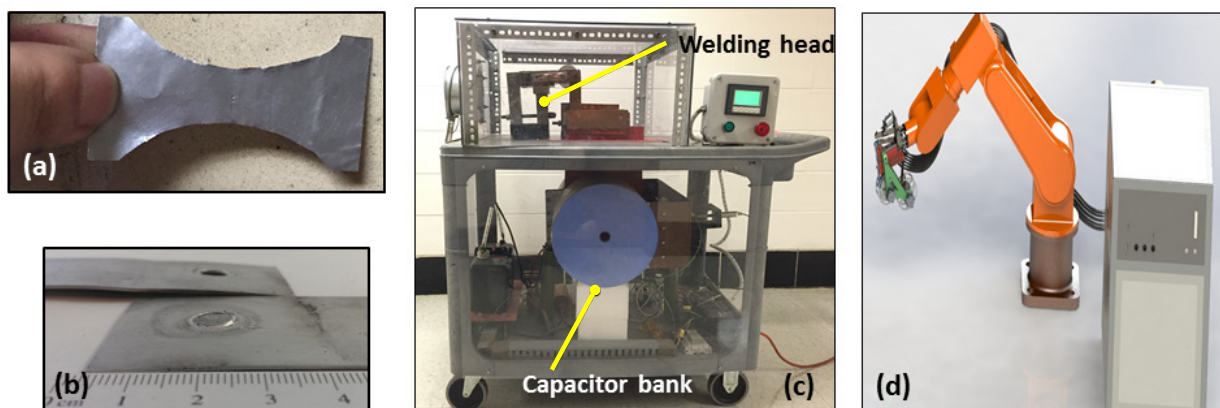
Low-energy welding (a) 2-in. long "spot welding" foil, (b) a mechanically tested AA6111-T4 weld specimen, (c) lab-built apparatus with a small spot welding head and a fast, low-energy capacitor bank, and a (d) schematic of possible robotic implementation.
